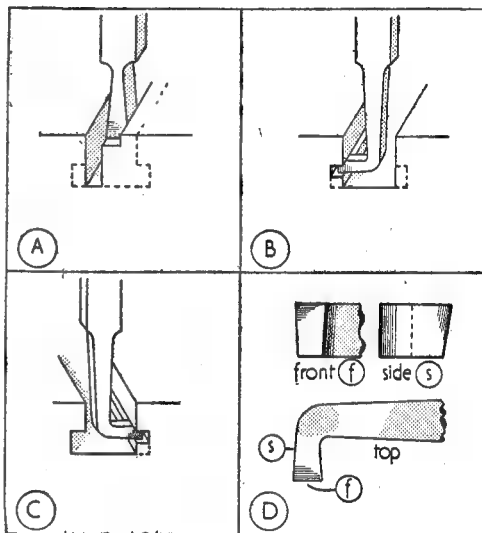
Stages in shaping a T-slot: "A"—cutting to the full depth with a parting tool; "B"—undercutting one side of the slot; "C"—undercutting the opposite side; "D"—the special undercutting tool
